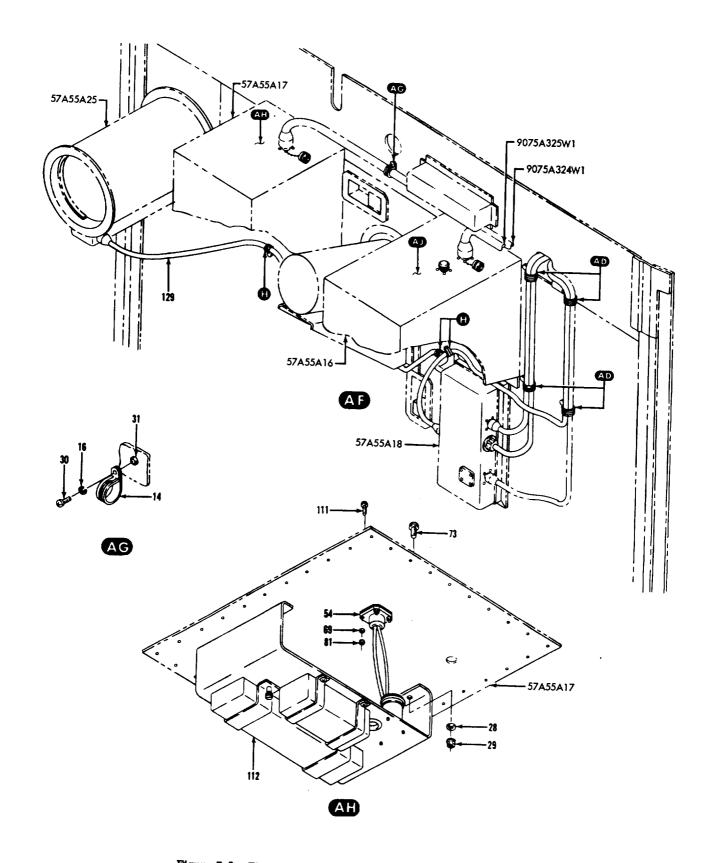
Electrical Equipment Installation (Sheet 11 of 19)
